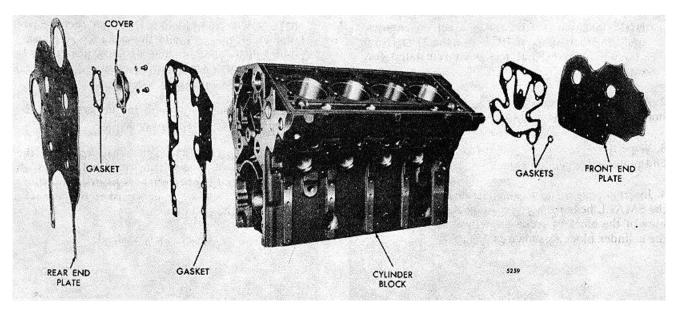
Cylinder Block End Plates and Relative Location of Parts
